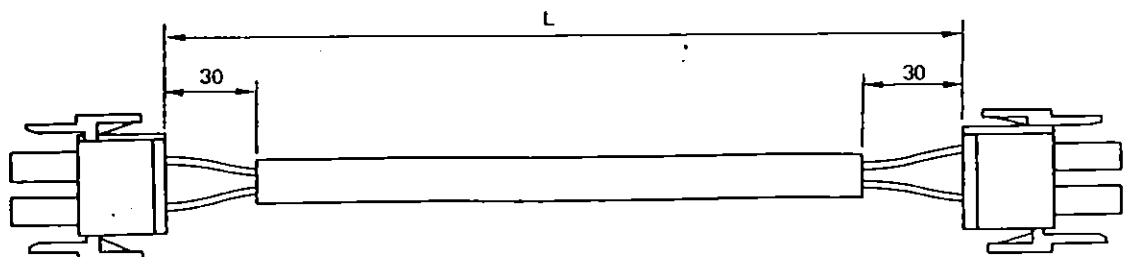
Cable B660-0625-T328A, T355A
